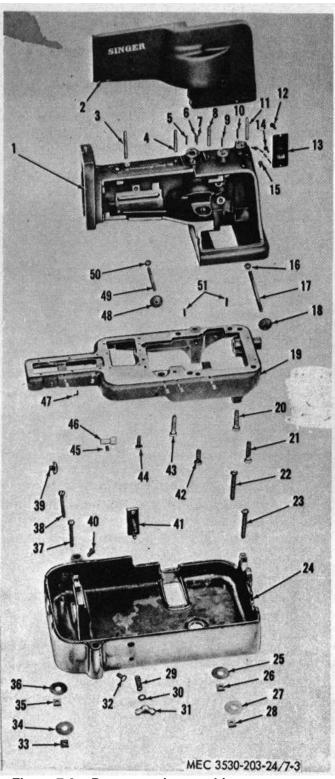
Button sewing machine arm, cover, bed, and base.
